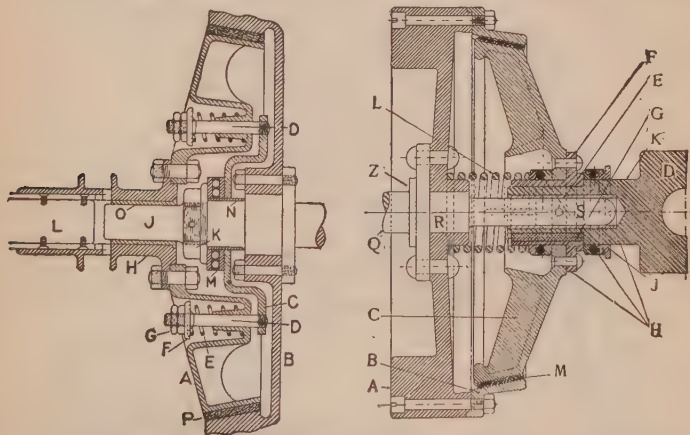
External cone clutch. A, fly wheel clutch cone; B, fly wheel; C, fly wheel clutch stud plate; D, D, clutch spring studs; E, clutch spring; F, spring retainer; G, retainer lock nut; H, sliding sleeve for setting clutch; J, crank shaft end; K, crank shaft nut; L, tail shaft; M, ball thrust collar; N, ball thrust bush; O, sliding sleeve bush; P, clutch cone leather.
